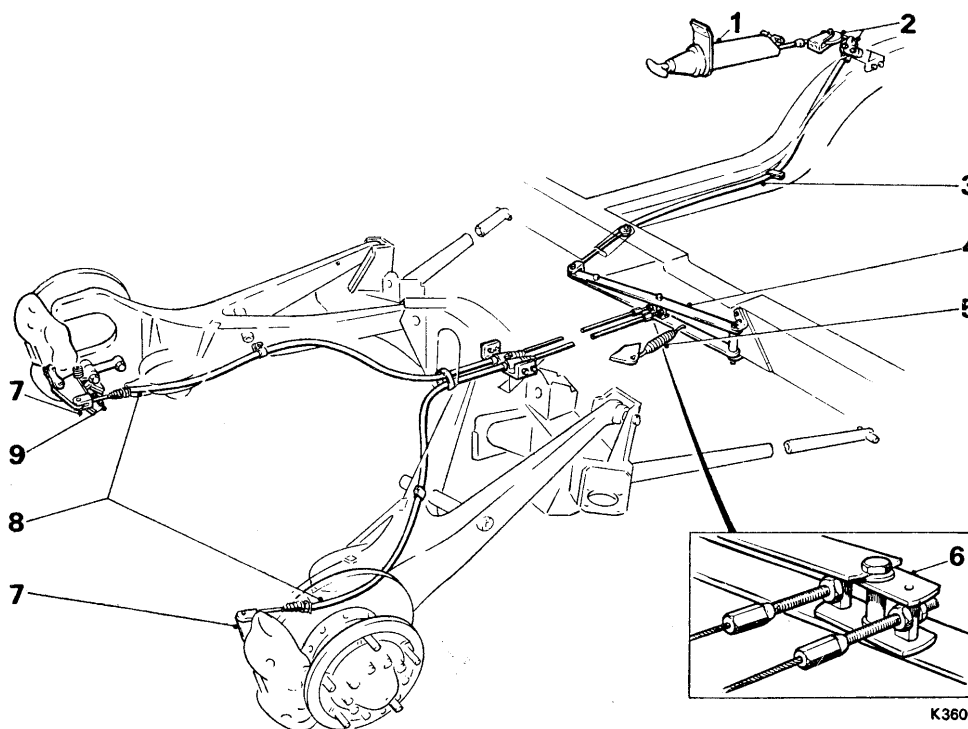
HAND BRAKE LINKAGE—EARLY L.H.D. CARS
